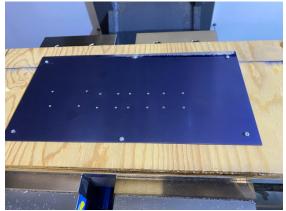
Anodized sheet of 6061 1/8" thick aluminum being milled
